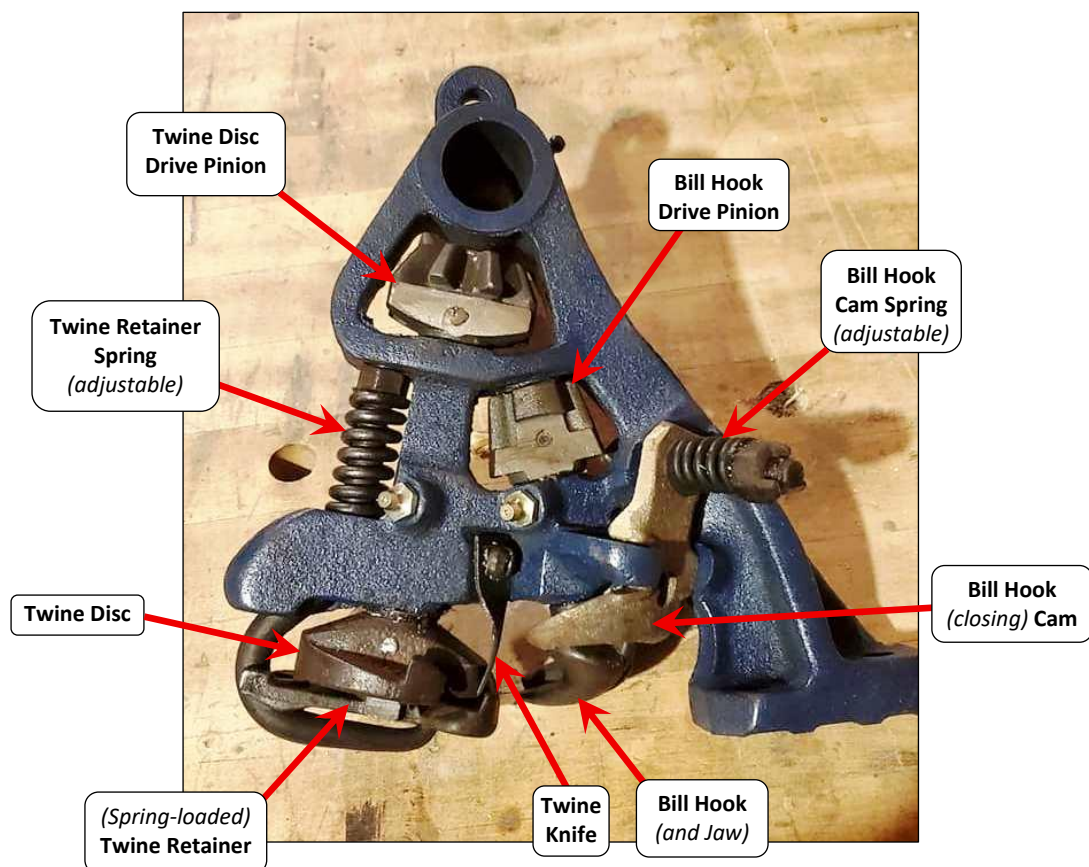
McCormick binder knotter – Viewed from side which fits against the Cam Gear
